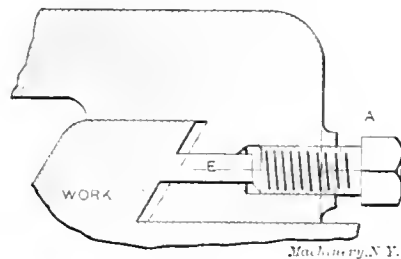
Meene for Holding Work against Locating Side of Dove-tail Slide of Boring Jig in Fig. 126.
